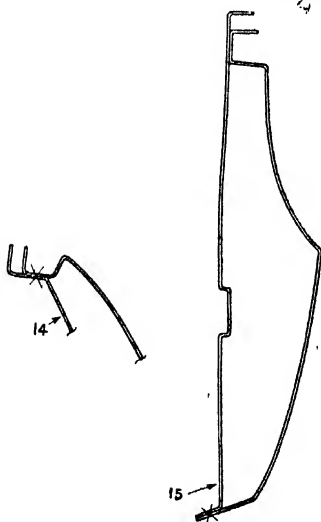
(left).—SUBASSEMBLY DRAWING SHOWING THE POSITIONS OF THE WELDS.
